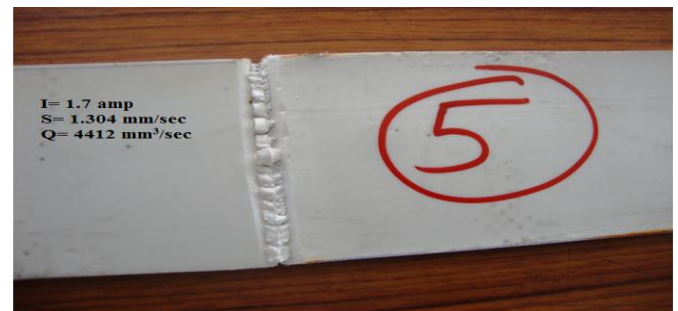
Weld bead formed in 5<sup>th</sup> experiment
